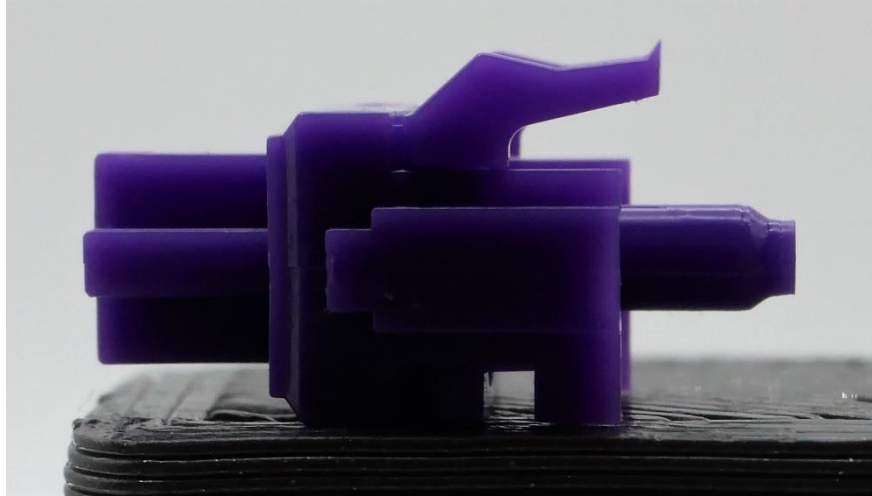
TKC Blackberry stem front plate showing mold ejector circles and movable stem legs of the clicky mechanism.
